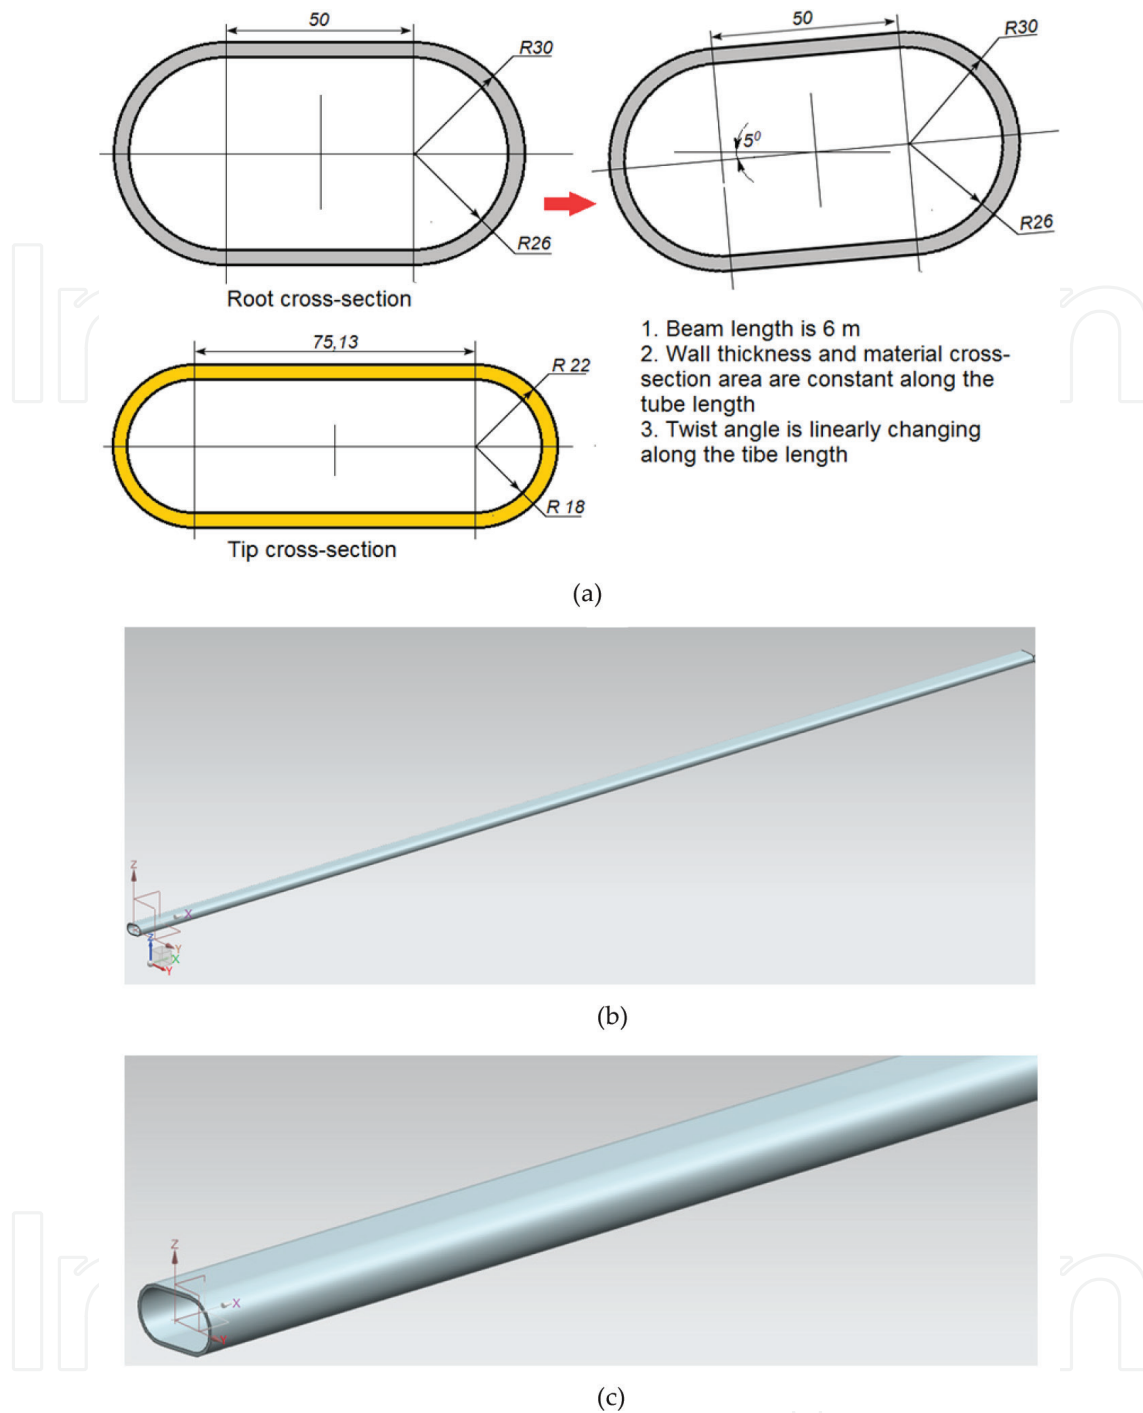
Sketch of the beam cross-sections (a), 3D view of the CAD model and magnifying view on the cross-section of optimizing structure.
